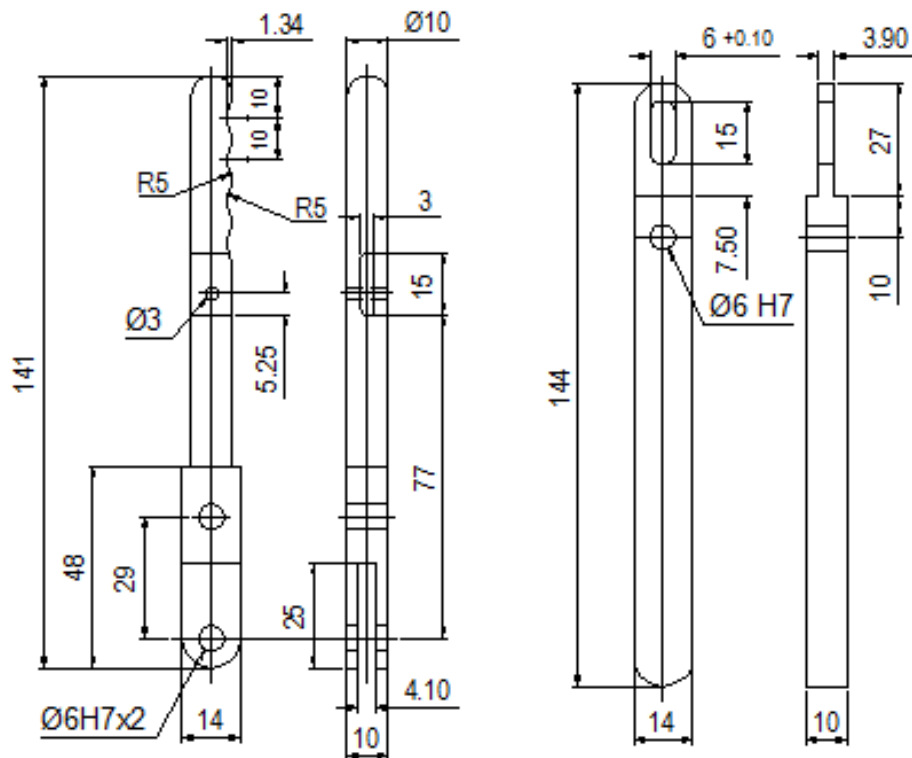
Clutch Lever Mounting Brackets And Clutch Lever
